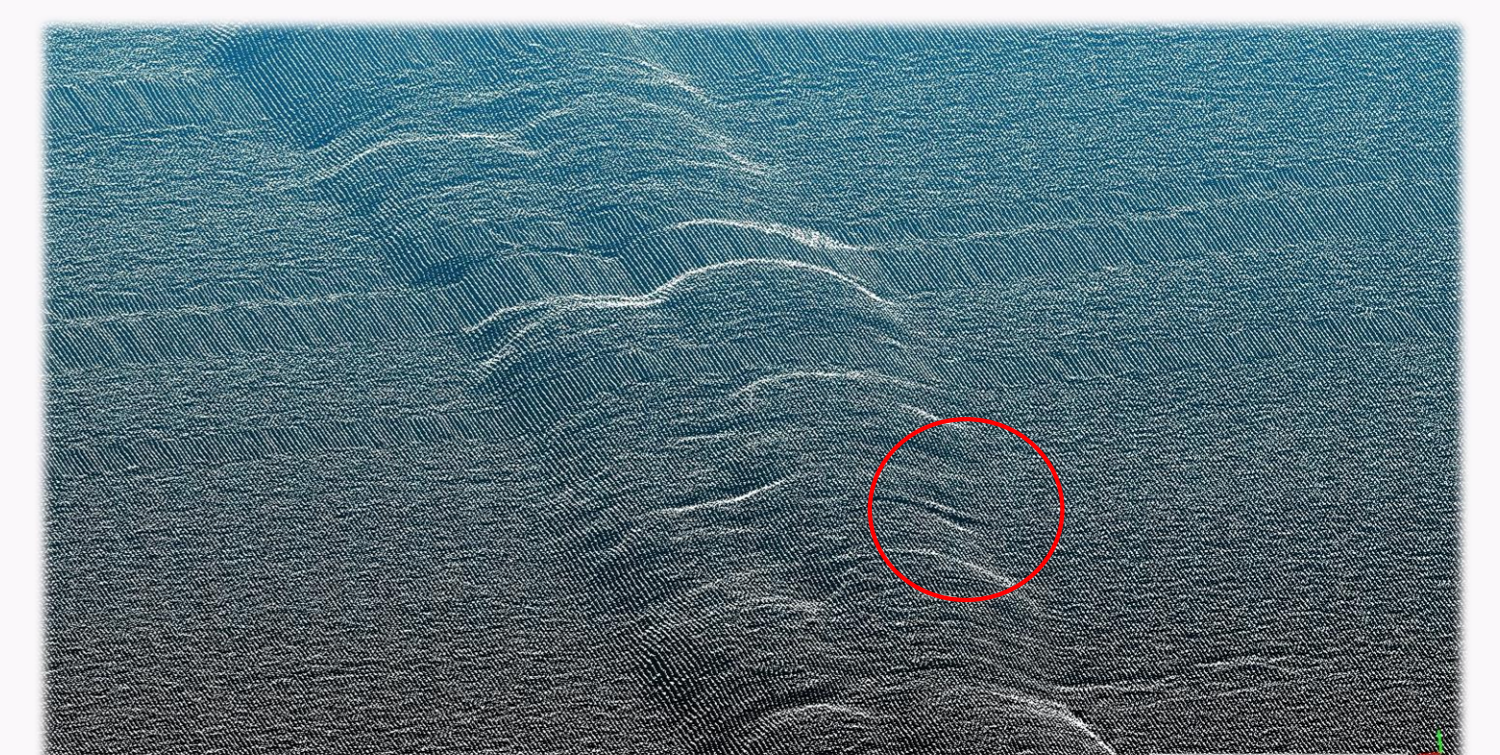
Welding surface reconstruction with defect identification based on set rules.
